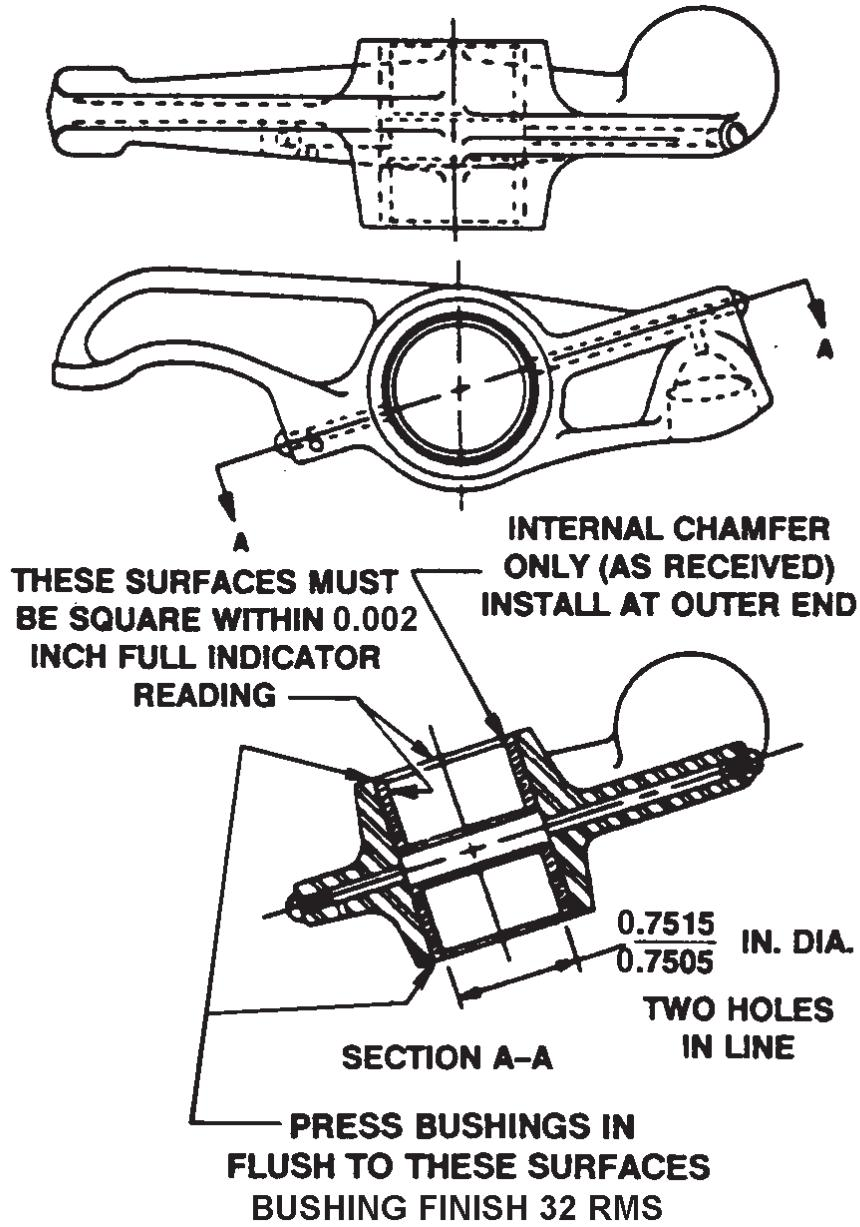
Rocker Arm Bushing (Dual Bushing Type) Replacement
